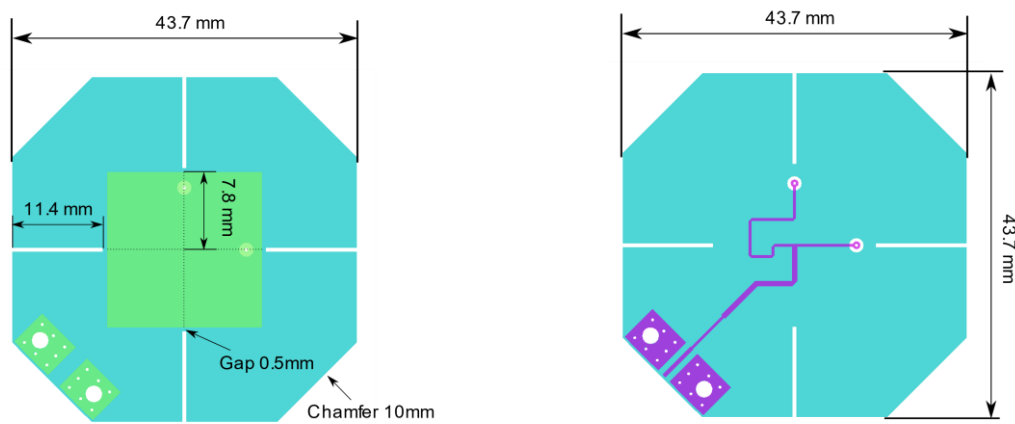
Design of the final prototype. Top (left) and bottom view (right).
